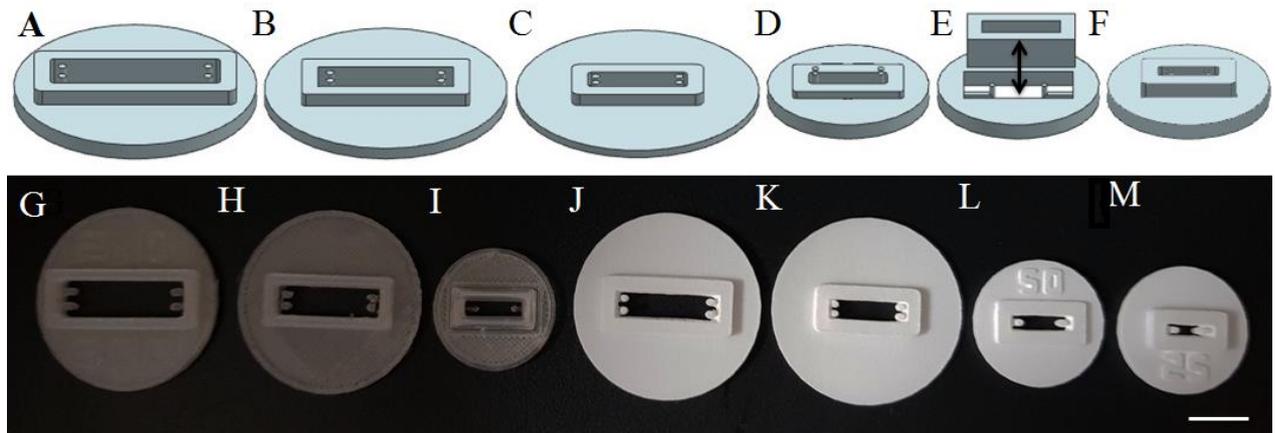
CAD model of (A) 500 μ L mould (B) 250 μ L mould (C) 100 μ L mould (D) 50 μ L mould (E) 2-part 50 μ L mould (F) 25 μ L mould (G) 500 μ L mould printed via FDM (H) 250 μ L mould printed via FDM (I) 2-part 50 μ L mould printed via FDM (J) 250 μ L mould printed via LS (K) 100 μ L mould printed via LS (L) 50 μ L mould printed via LS (M) 25 μ L mould printed via LS. Scale bar = 10 mm.
